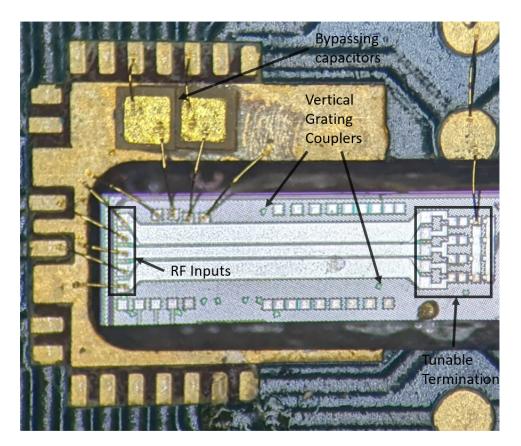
Assembly of the TW-MZM on a PCB. The PCB was milled to reduce the length of the RF wirebonds from between PCB and the TW-MZM. 1.2 nF Presidio wire-bondable bypassing capacitors were added to the heater biases.
